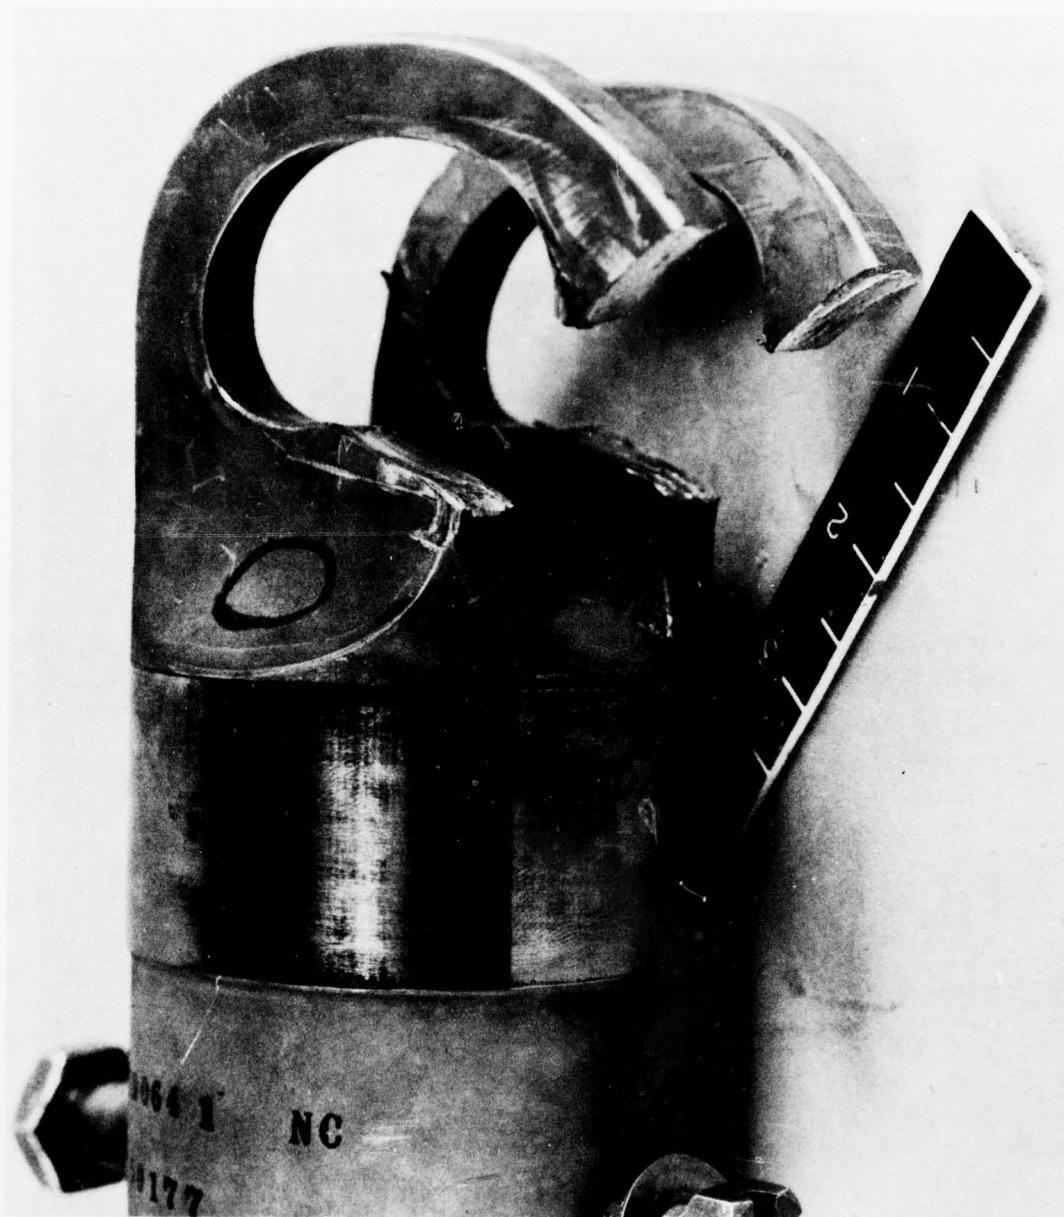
Drag Strut Pick-up Lugs After Failing Load Test
